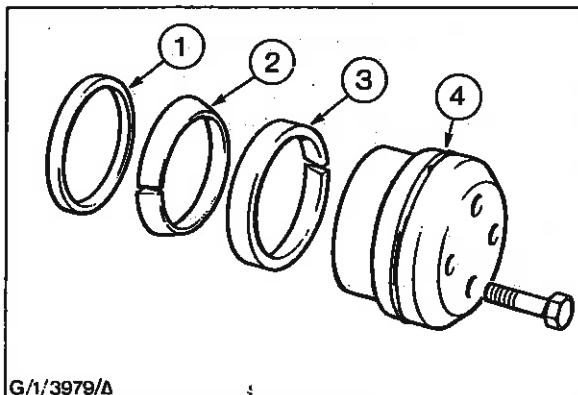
Crankshaft Pulley Retaining Components - 2728T Engine (Ringfeder Locking Mechanism)
